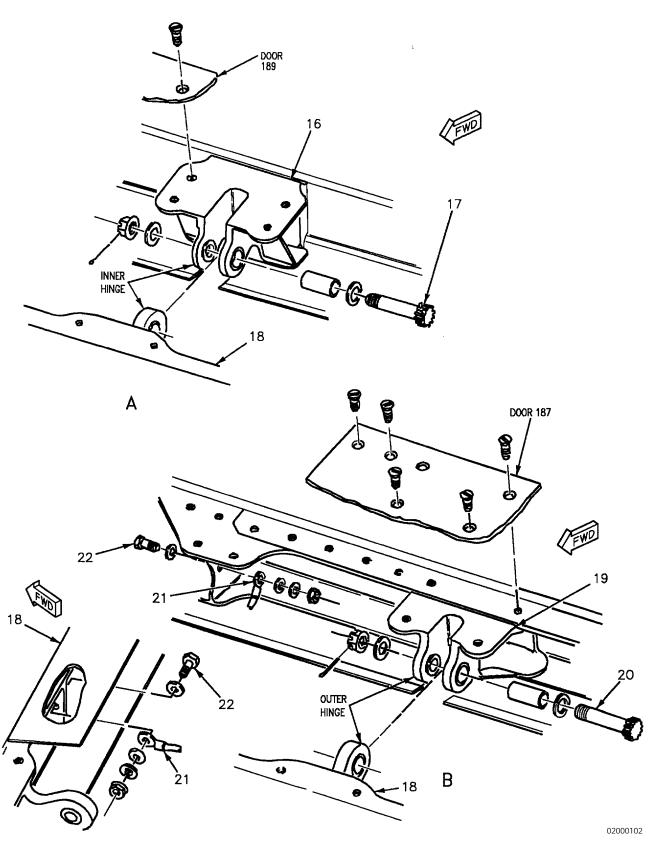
Outer Wing Leading Edge Flap (Sheet 2)
